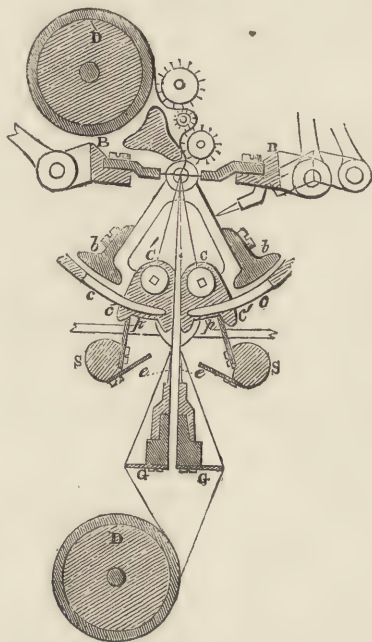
WORKING PARTS OF LACE MACHINES.
